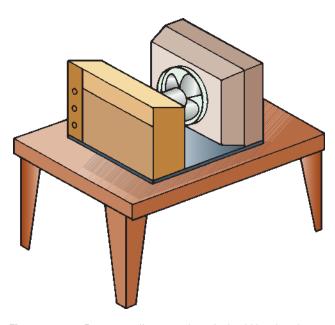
For proper alignment, the unit should be placed on a level surface while the fan and blades are being installed.
